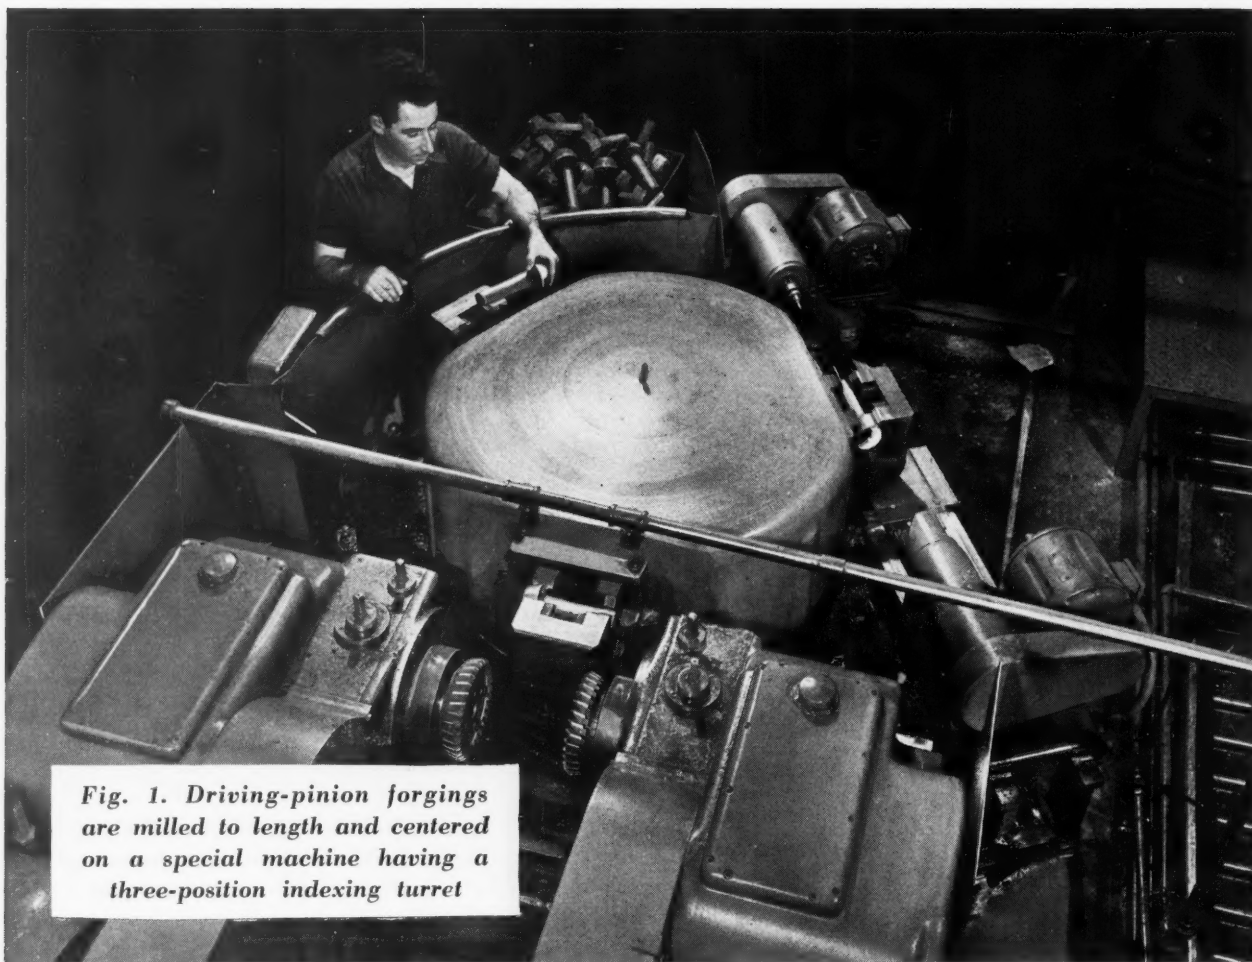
Driving-pinion forgings are milled to length and centered on a special machine having a three-position indexing turret
